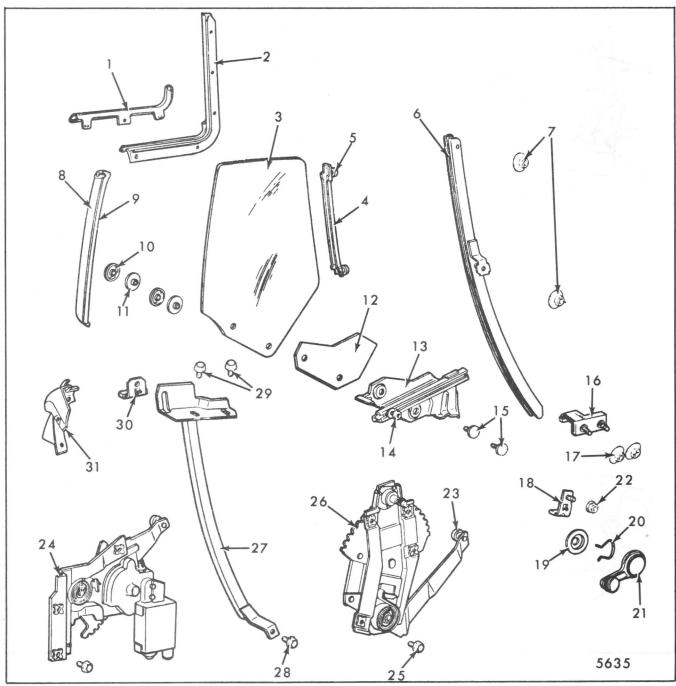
Rear Quarter Window Assembly and Components - "B-57" Styles
